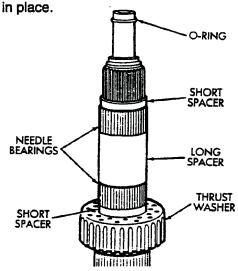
Install Mainshaft Thrust Washer, O-Ring, Needle Bearings and Spacers
